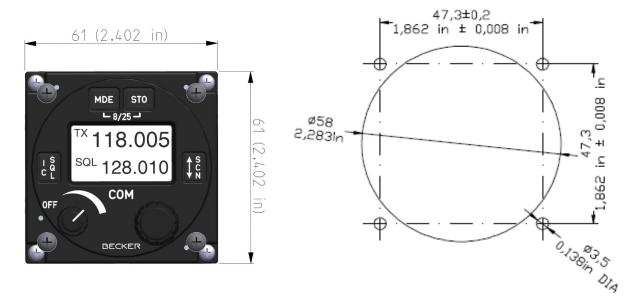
AR6201 and RCU6201 front view, dimensions in mm and (inches)
